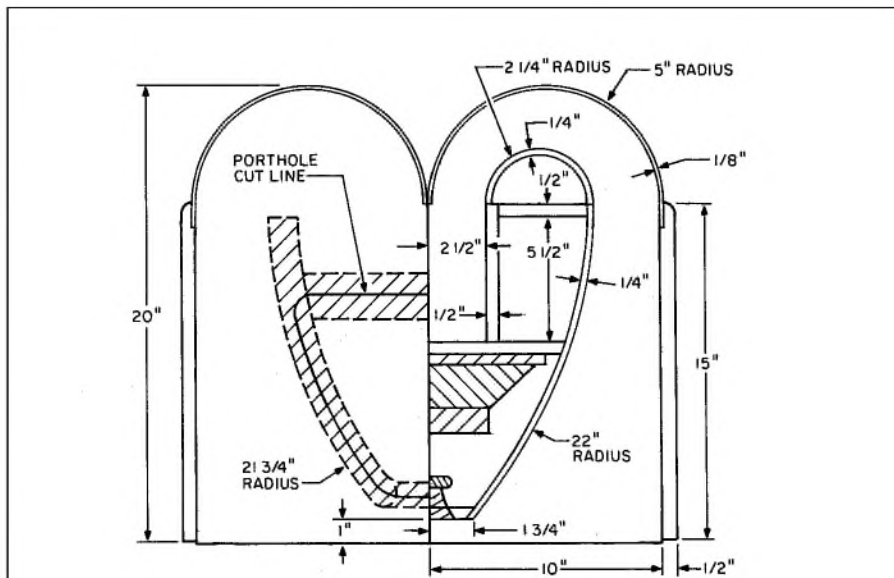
DR10a top/bottom view. Right half of view shows location of horn braces, port hole flanges, and port hole cut line. Left half of view shows interior parts. Note, not all parts are shown, see text for details.
